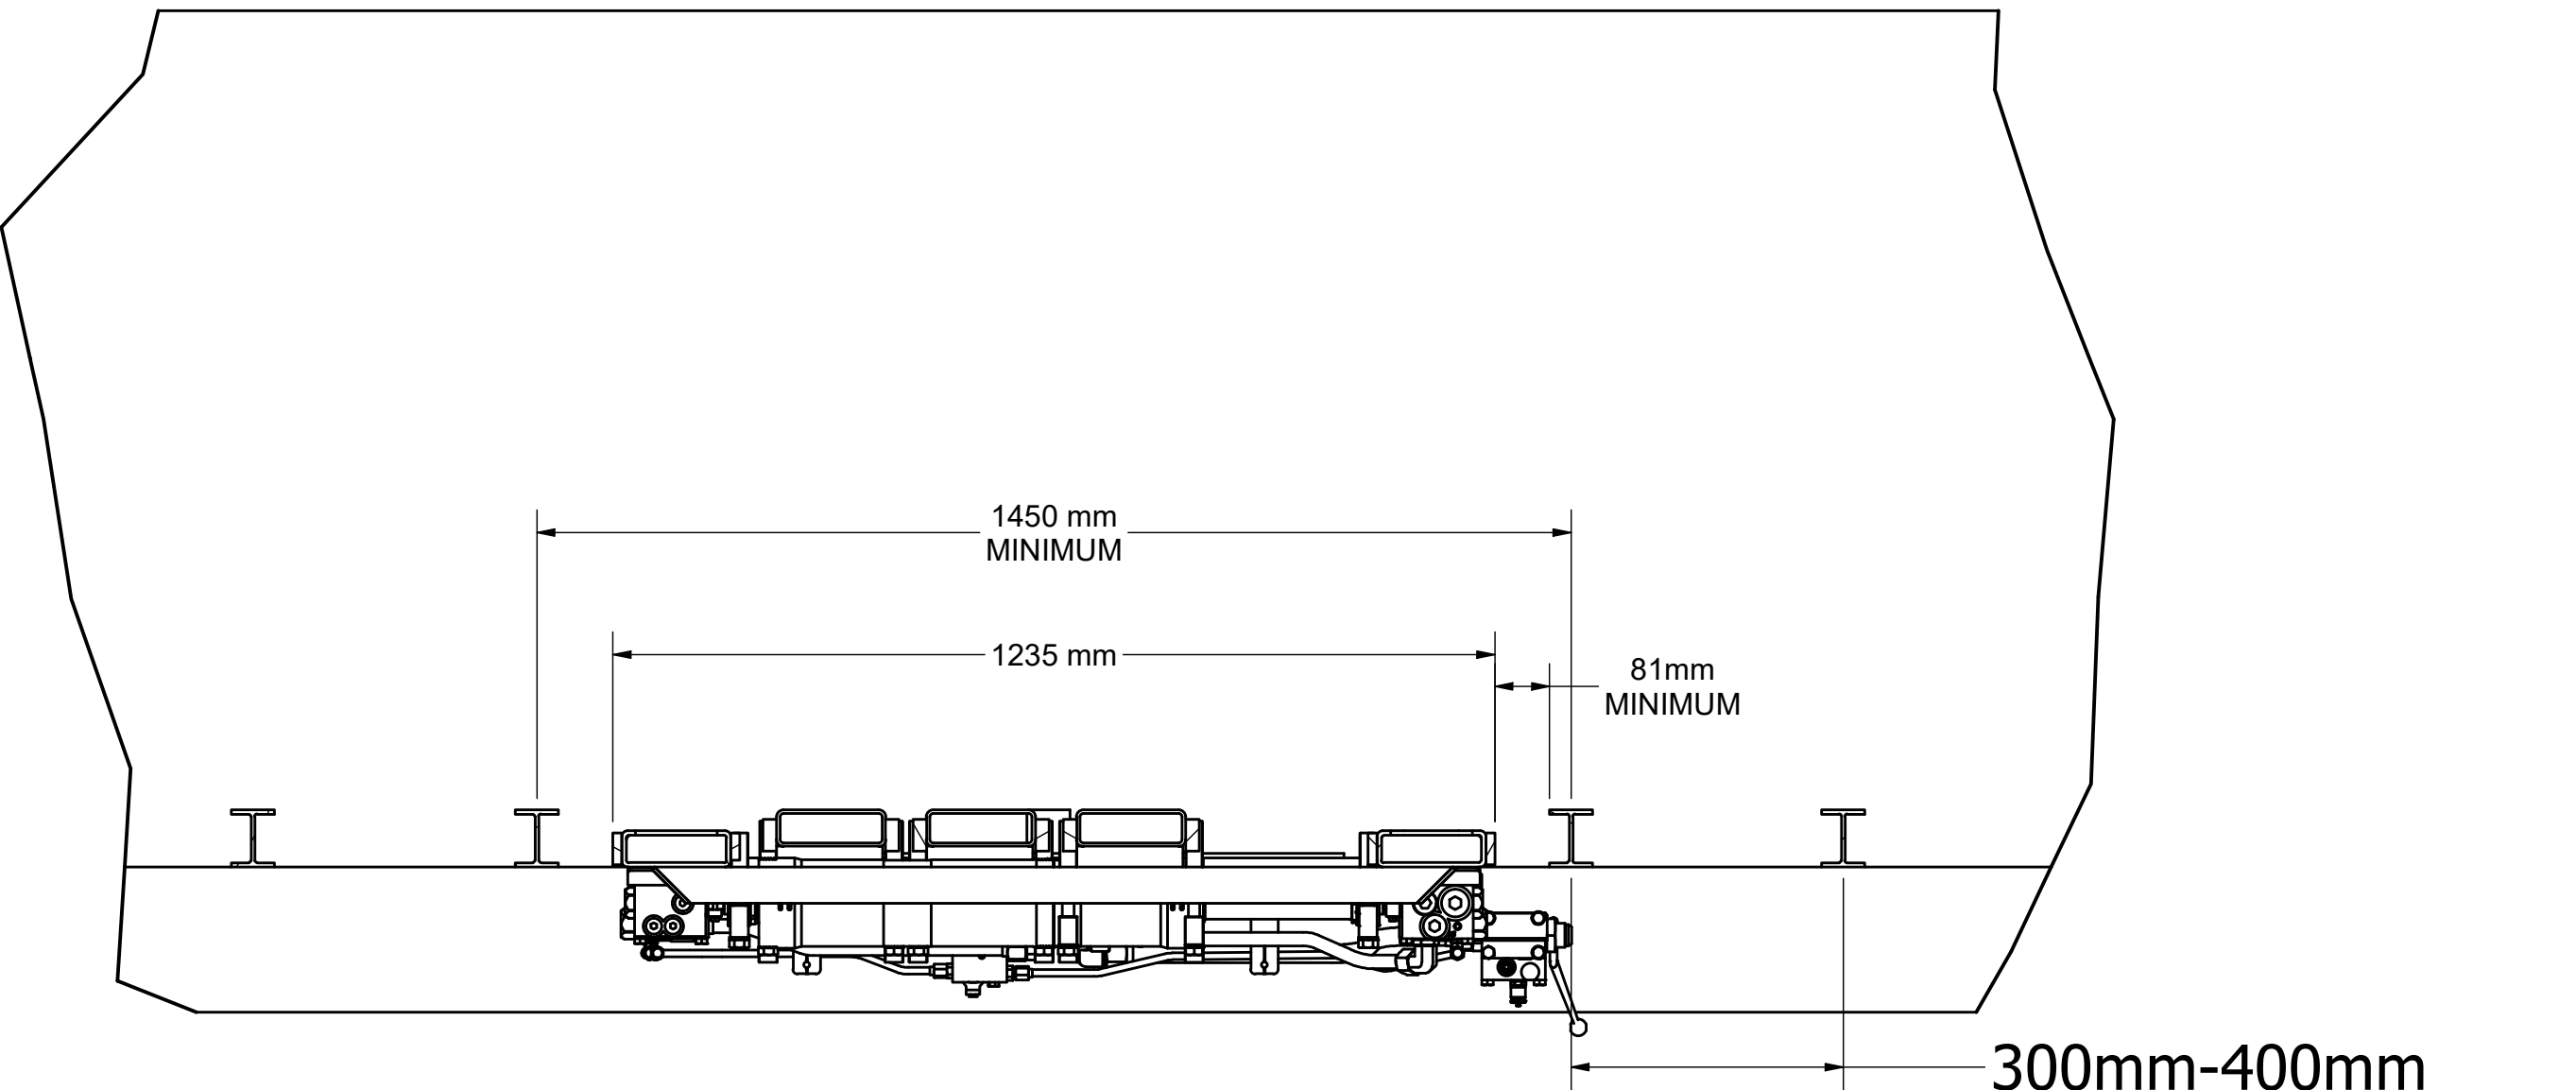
OPENING IN CROSS-MEMBERS FOR DRIVE UNIT SIDE VIEW IN TRAILER
